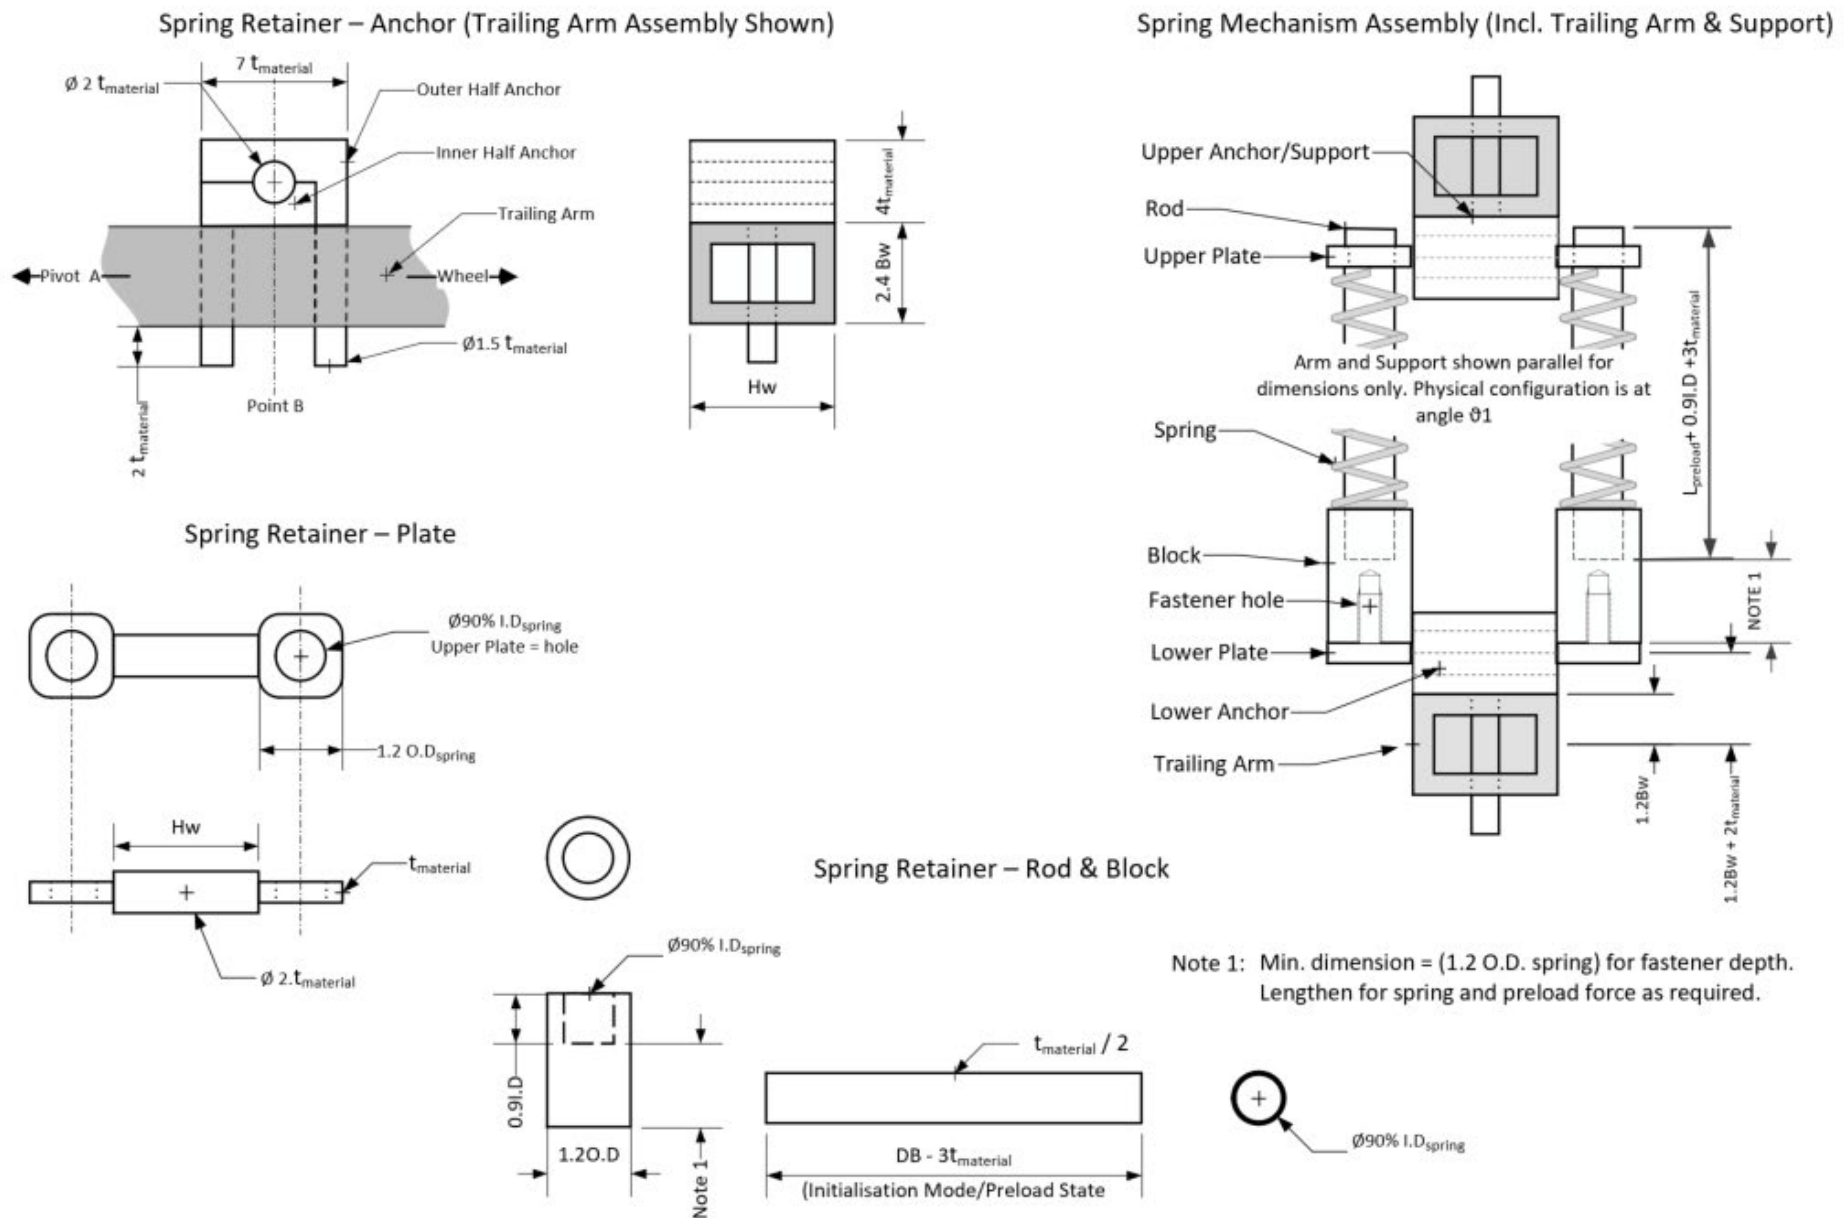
Spring Mechanism - Parts and Assembly Drawings
